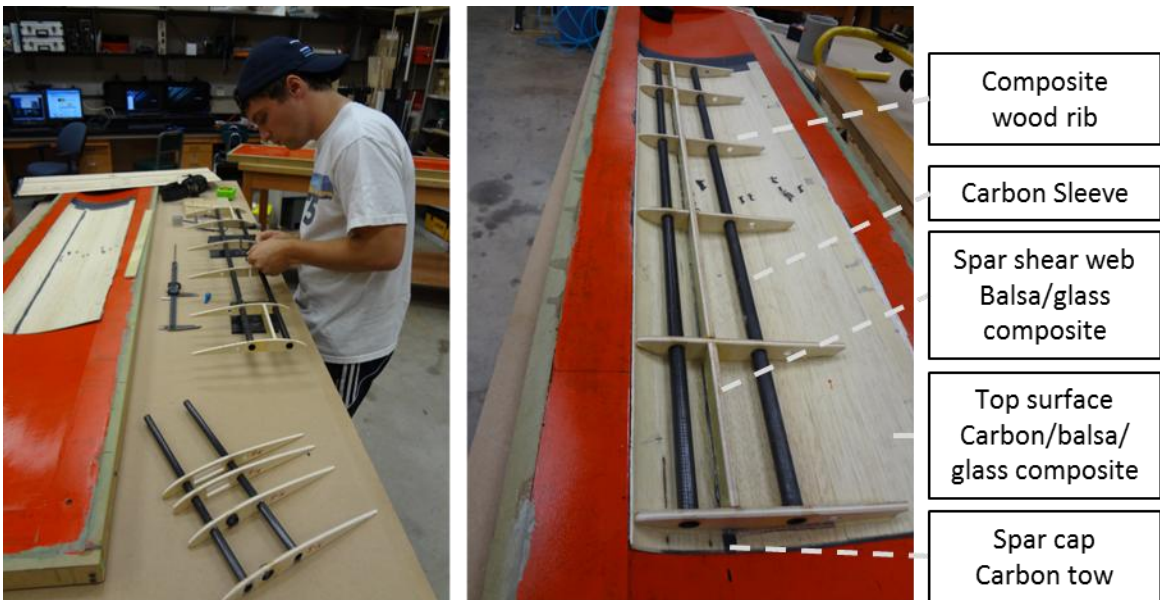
Installation of shear web and carbon fiber sleeves for holding wing inserts
